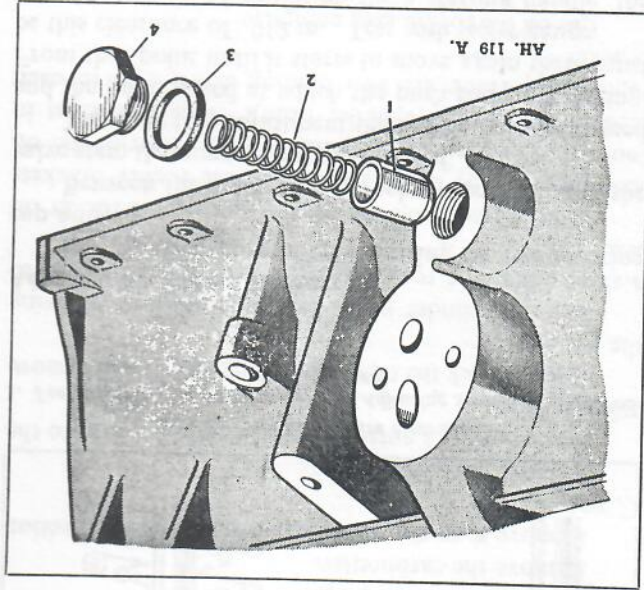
Oil release valve assembly. 1. Release valve. 2. Spring. 3. Washer. 4. Cap nut.
